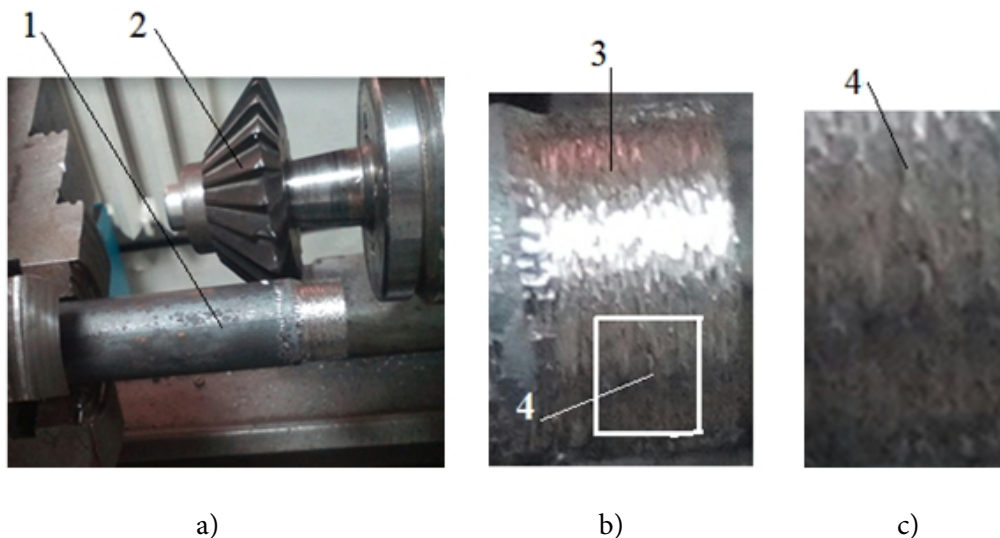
The processing of steel 3 on case of simultaneous rotation of workpiece and tool
